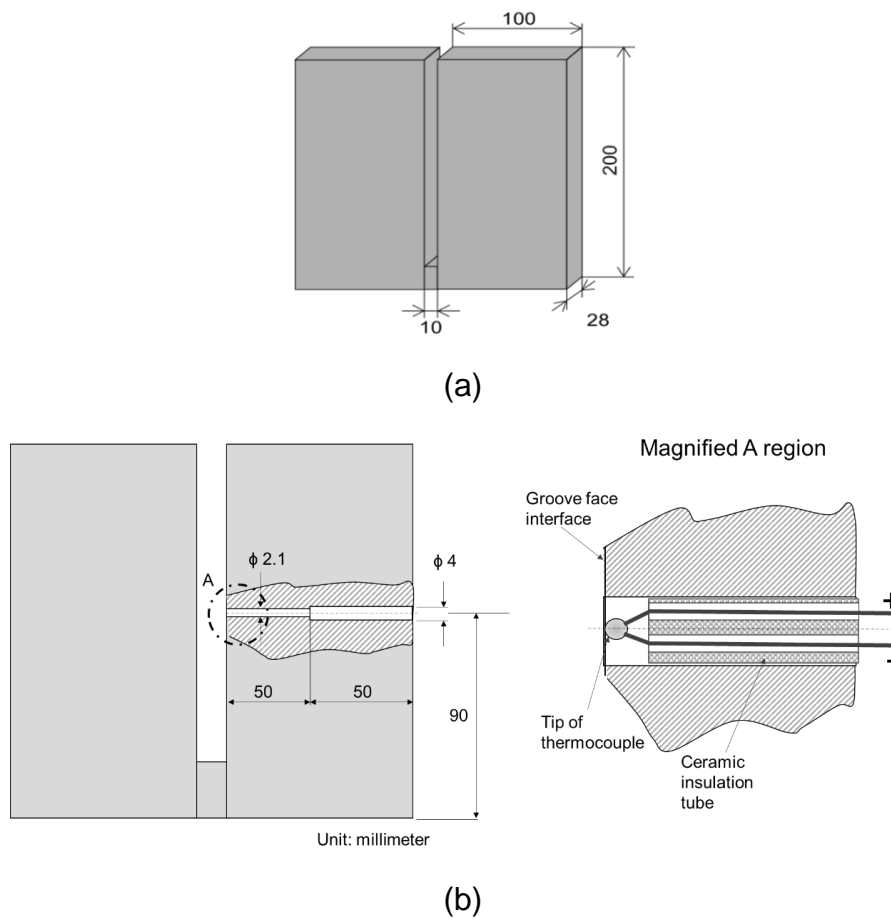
Specimen dimension and weld joint configuration (a) and schematic illustration of a preparation of temperature (cooling) measurement for fusion zone (b)
